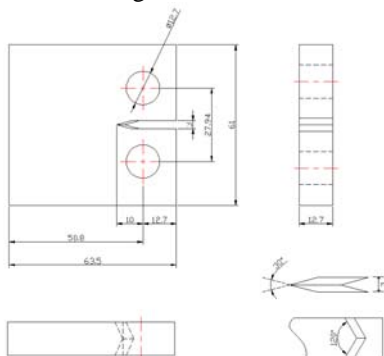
CT specimen for the fatigue crack growth test
